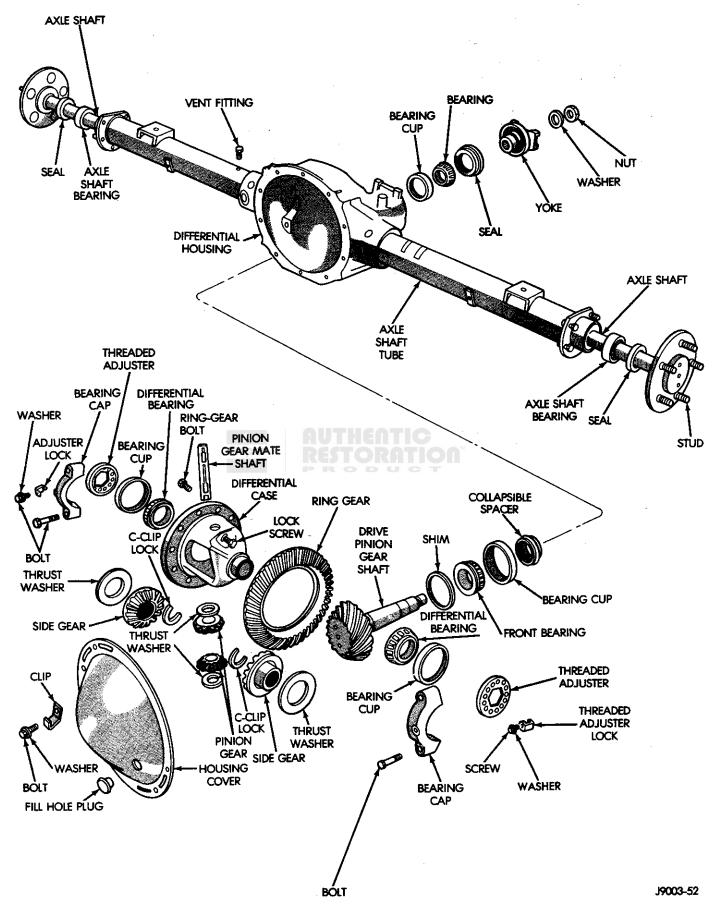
Rear Axle With 8 3/8-Inch Ring Gear
